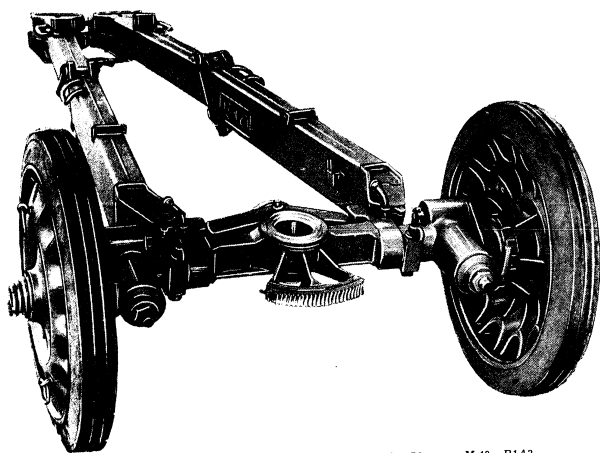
BOTTOM CARRIAGE FOR MOUNTAIN GUN 76 mm M.48 B1A2 — GENERAL VIEW
